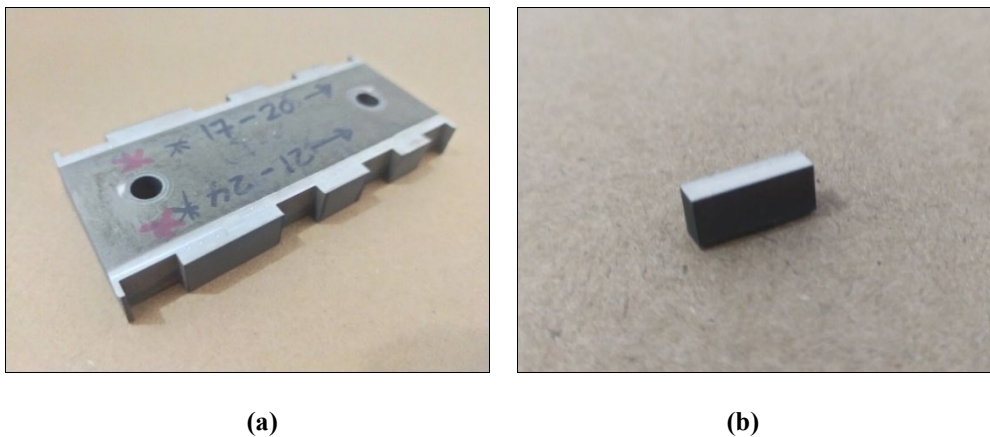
Inconel HX (a) cutting force specimen; (b) residual stress specimen
